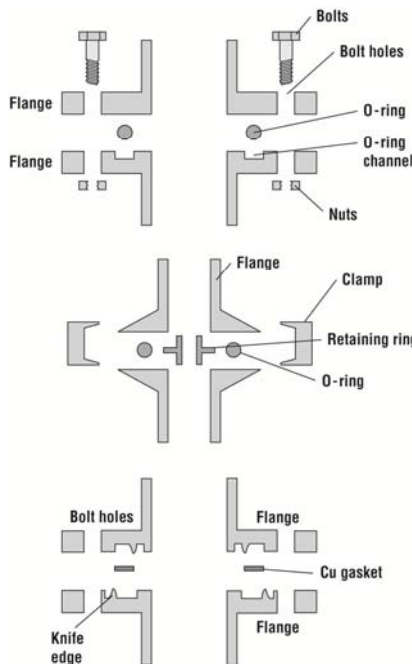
Two types of O-ring seals for medium vacuums and the Conflat® flange used for sealing high vacuum systems.
